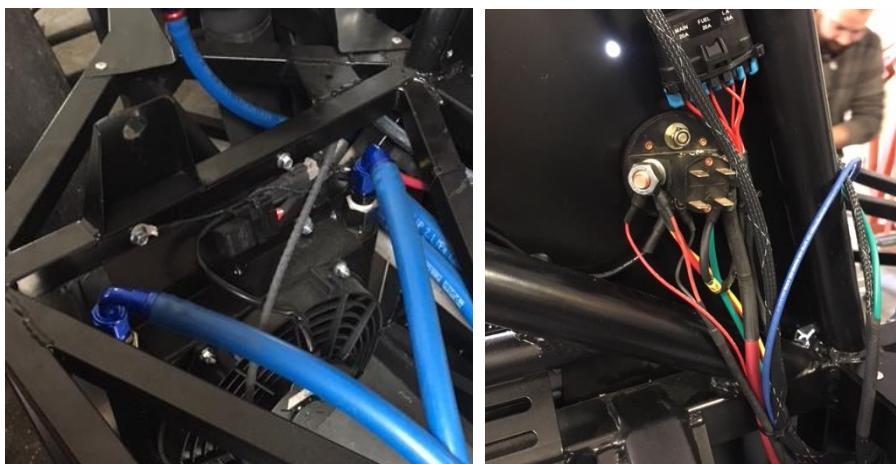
Oil Cooler Harness (Pod & Engine View)
